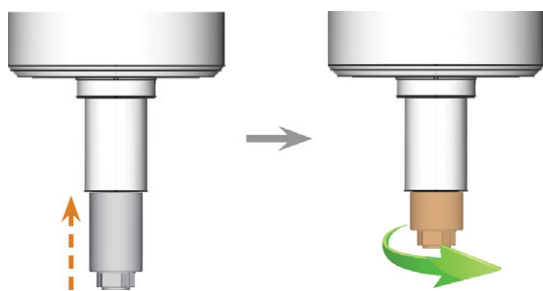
SCREWING IN THE COLLET CHUCK (MARKED ORANGE IN THE RIGHT ILLUSTRATION) INTO THE SPINDLE WITH YOUR HAND
